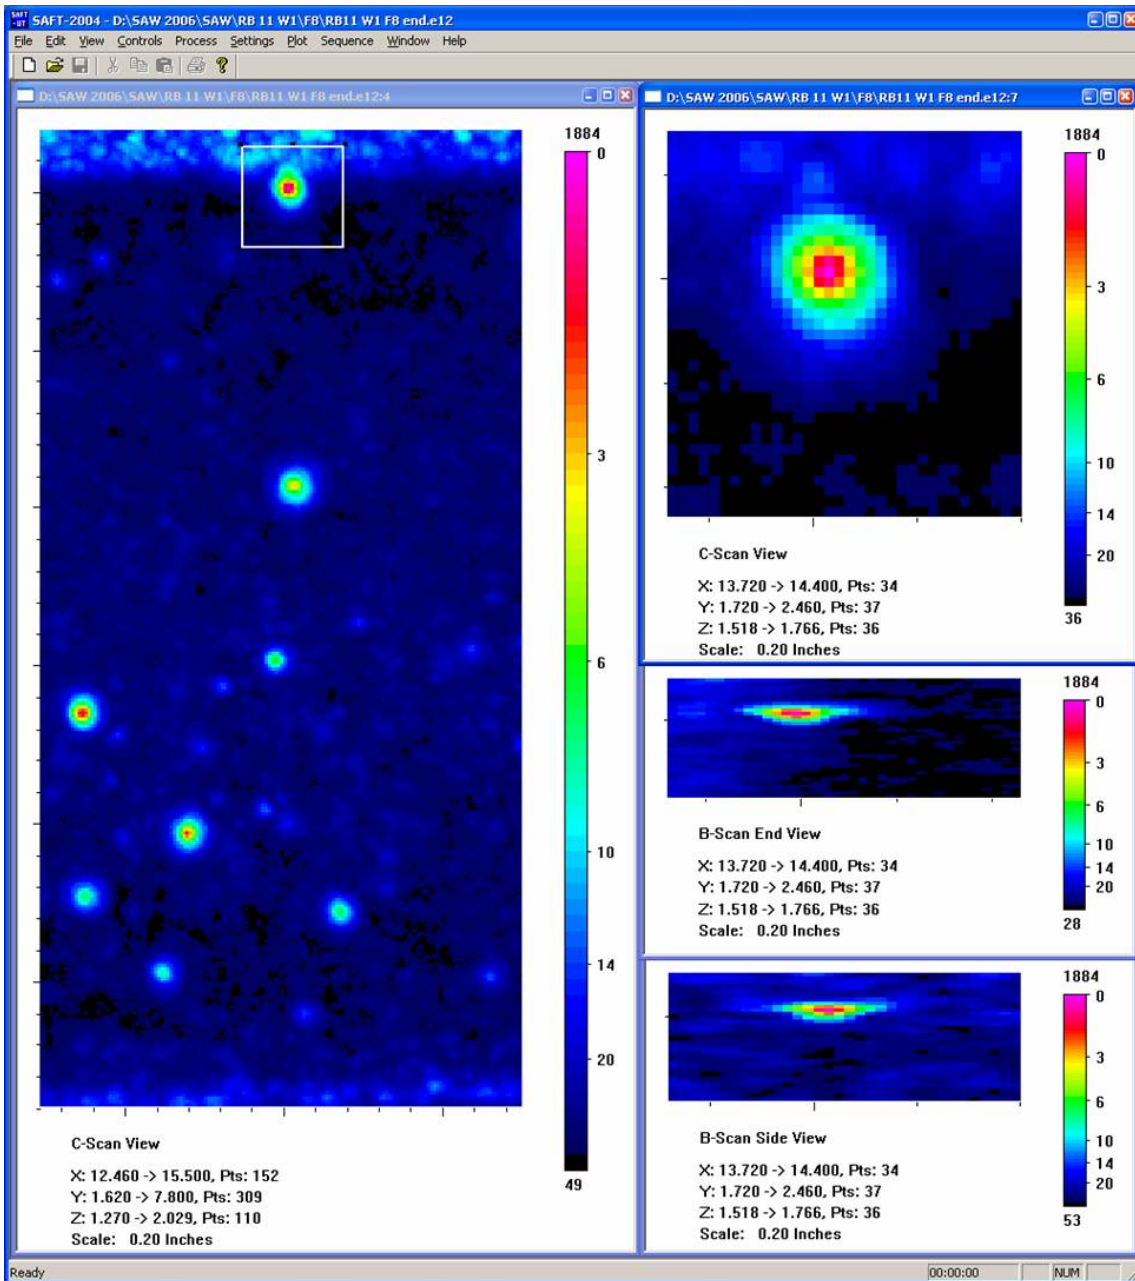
a 10 MHz F8 Immersion Testing Images of Small Fabrication Flaw: *RB4A*. This figure shows immersion testing data of a 6-mm flaw indication from the weld-normal testing of large weld segments. The flaw indication is identified in the box drawn in the SAFT-UT image on the left in the figure.
